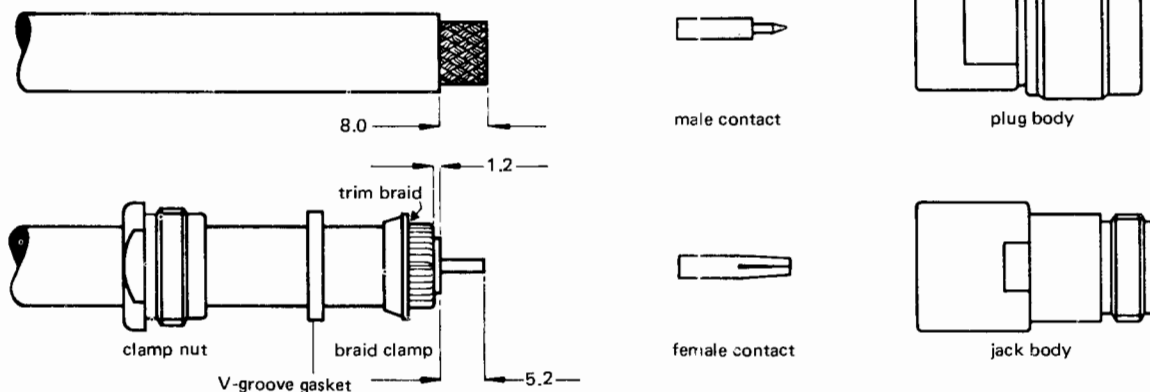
Improved MIL style braid clamp, non captive centre contact
